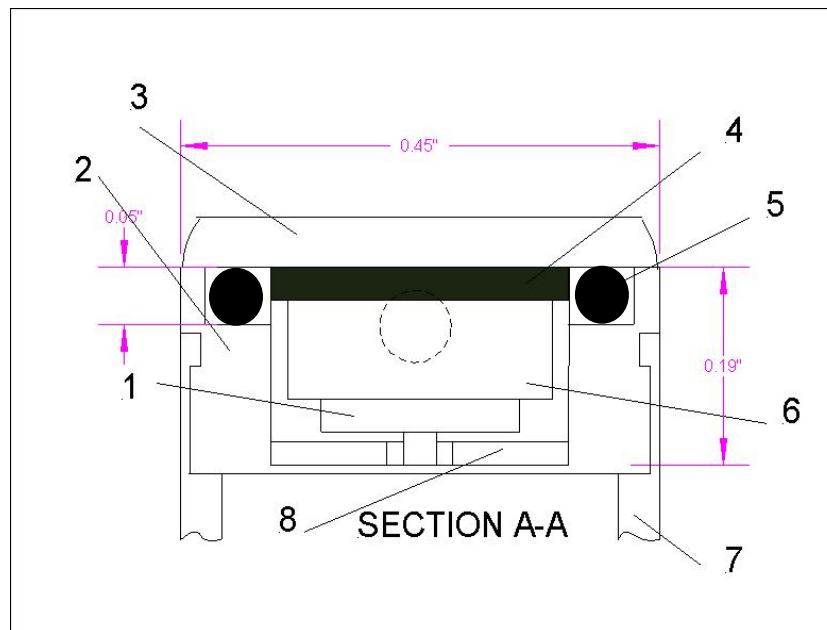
Cross-section of the implantable tonometer. (1) pin (2) stainless steel housing (3) Stainless steel lid (4) Rubber layer generating prestress (5) O-ring (6) PZT transducer (7) U-shape supporting structure
